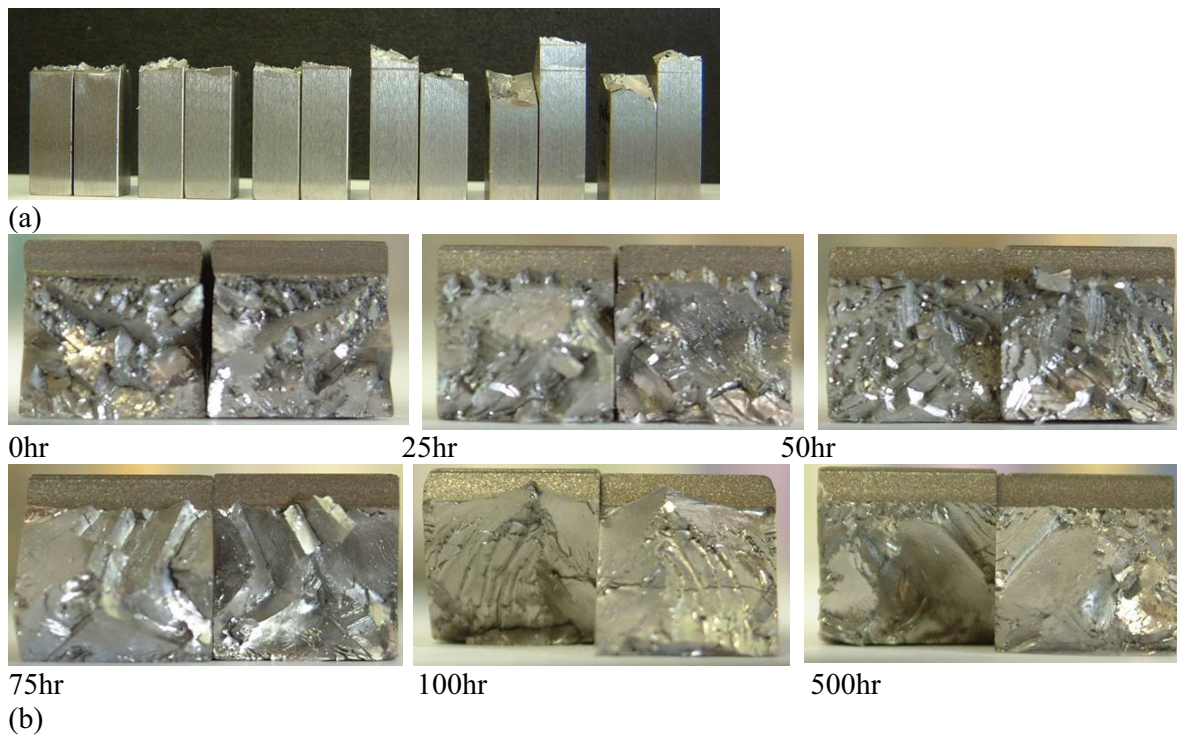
Fracture surface of Charpy impact tested MA956 rod. (a) side view(time increases from left to right) (b) top view.
